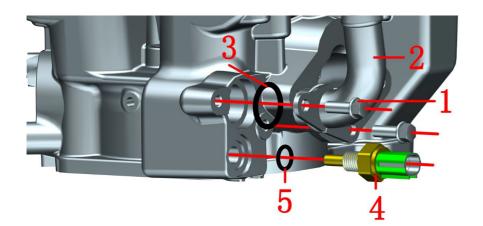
CYLINDER HEAD		Cylinder head assembly-2	CHK	Q
